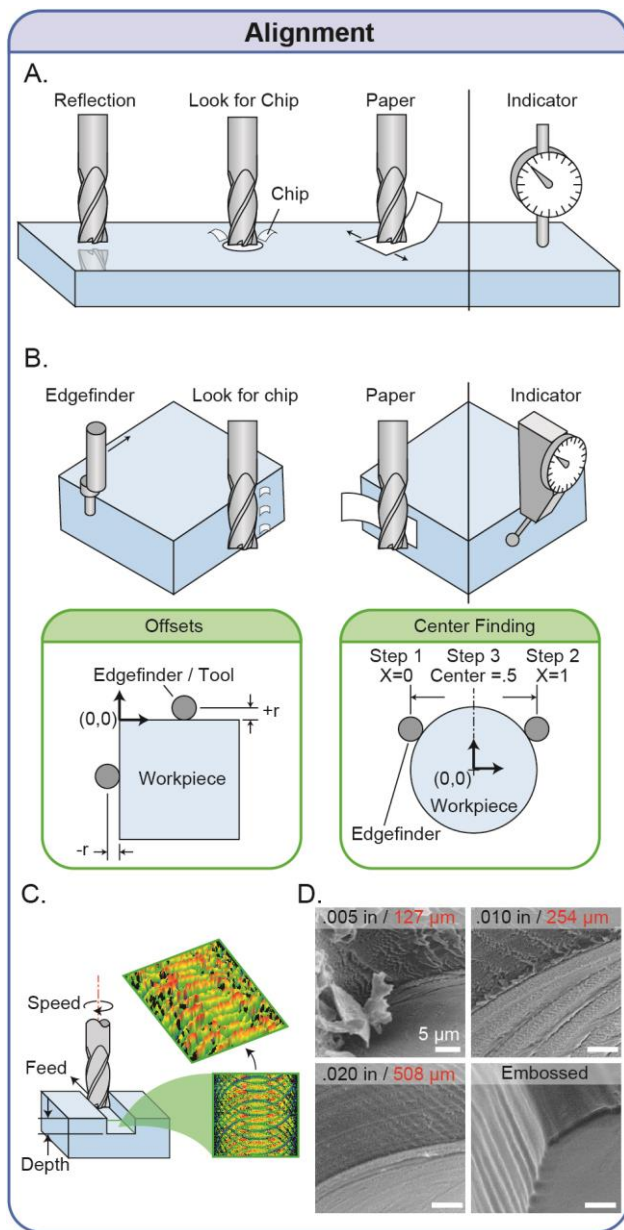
Tool alignment tips and tricks. (a) Methods for aligning the tip of the cutting tool to the surface, including visually verifying contact by reflection, looking for a chip of material, and using a piece of paper. (b) Methods for aligning the spindle axis to the edge of the part, including using an edgefinder, looking for a chip, or using a piece of paper. Green inset boxes represent: (i) the offsets from the tool edge to the spindle axis (left box) and (ii) a method to find the center of a workpiece (right box). Note that dial indicators can be used to detect the flatness of a surface or align a surface to an axis (a and b). (c) A milling operation is often defined by speed, feed, and depth of cut. The inset image was obtained from a profilometer measurement of surface roughness. (d) SEM micrographs of channels milled in PS with .005", .010", and .020" endmills, and an embossed channel. The object in the viewfield of the .005" endmill milled channel is a chip generated from the cut.
